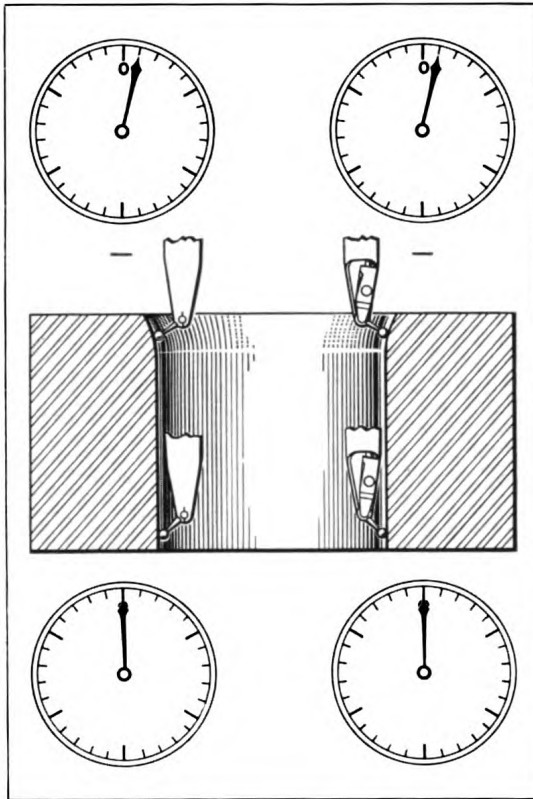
By disclosing bellmouth, the indicator completes its investigation of the geometry of a hole.
